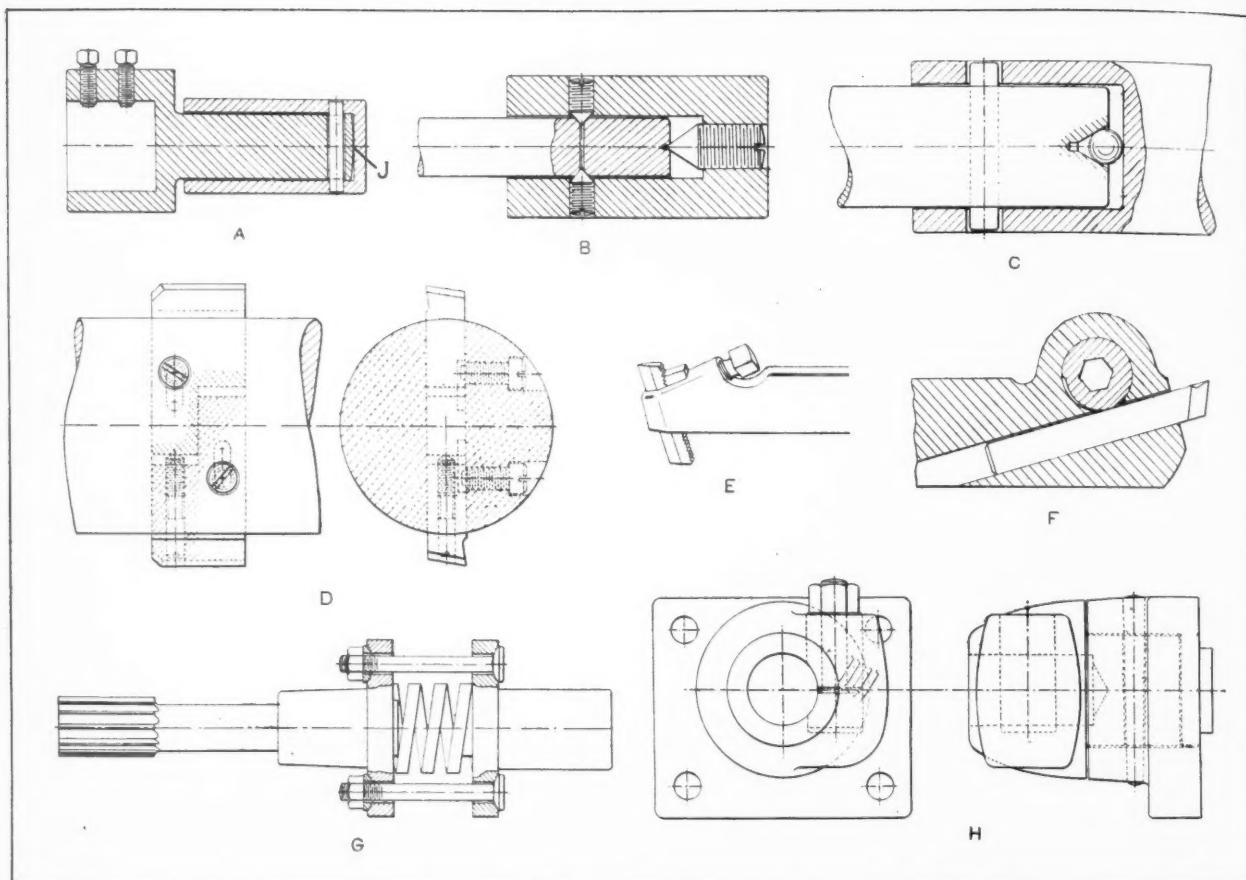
Holders of Floating Design, and Holders with Positive Adjusting Means
